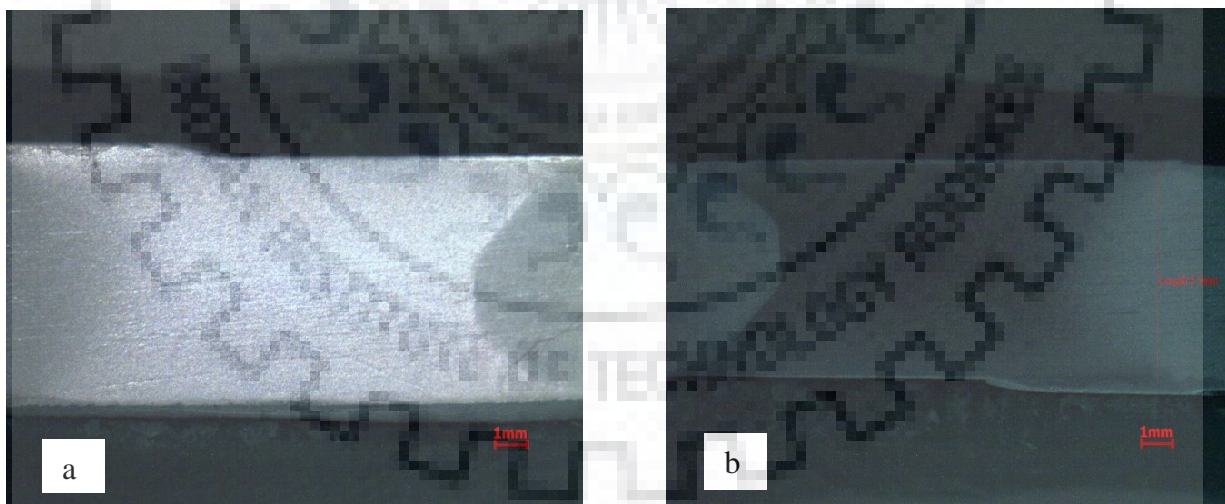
Bobbin FSW macrostructural cross-section of welded AA 6061
